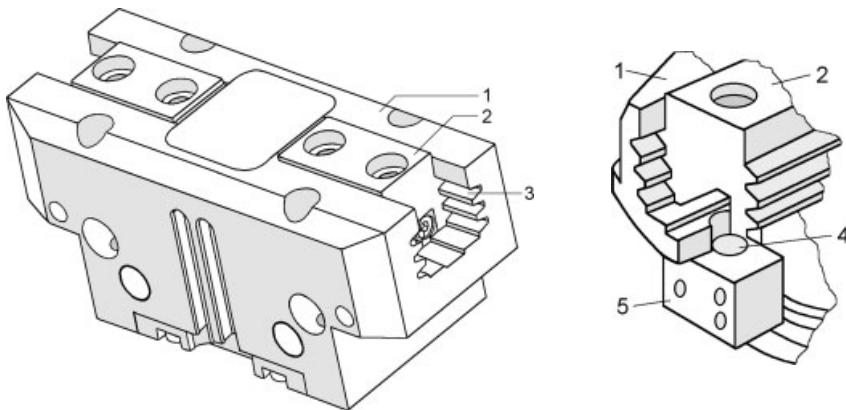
Robust universal gripper with precision multitooth guide available in eight installation sizes (*Schunk*).
